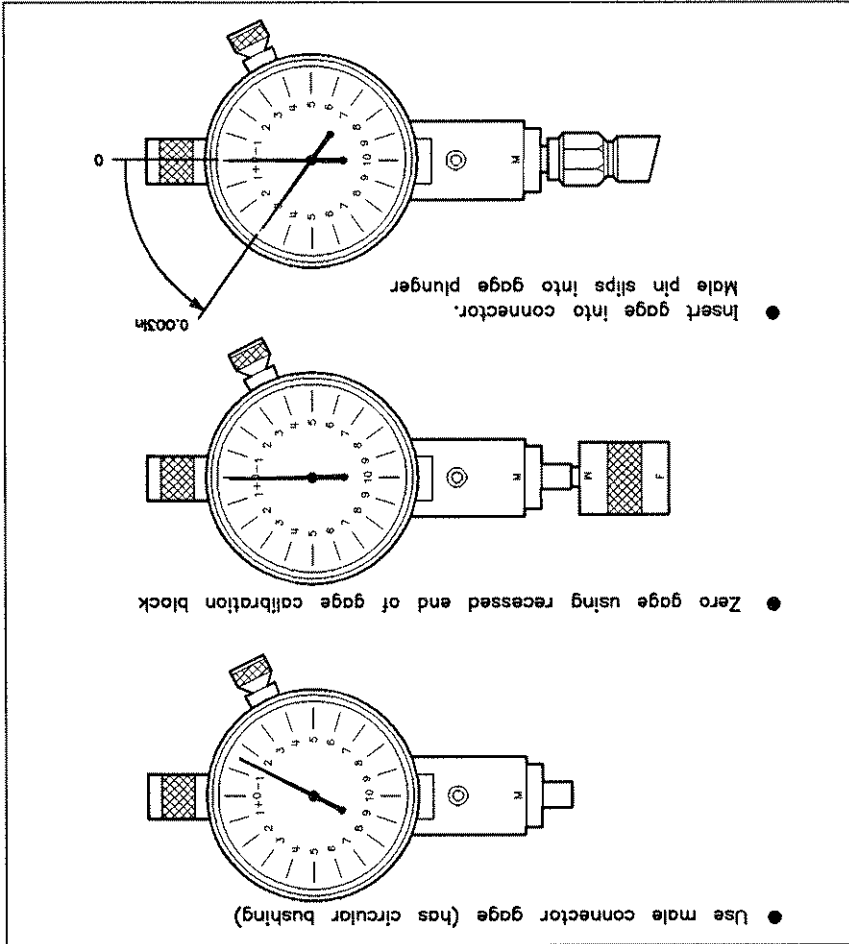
Gaging a 3.5 mm Male Connector Using a Push-on Type Gage
